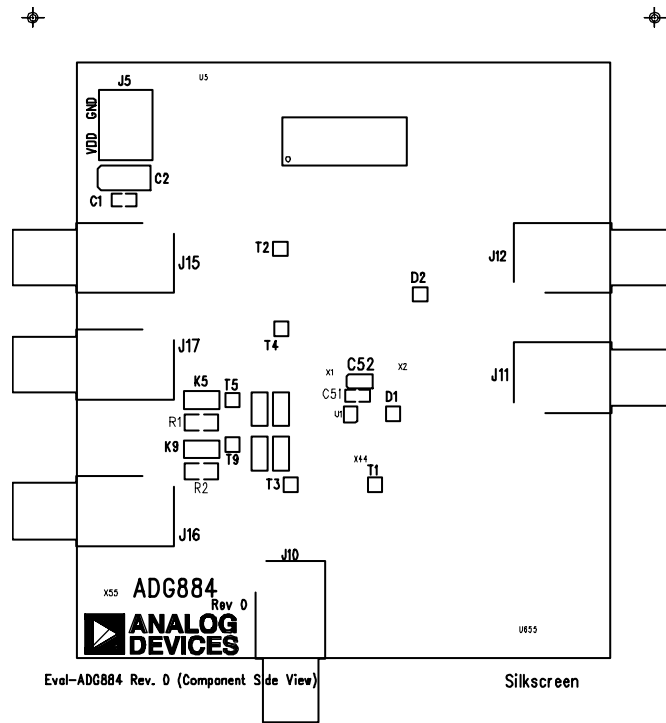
EVAL-ADG884EBZ Evaluation Board, Component Placement Drawing
